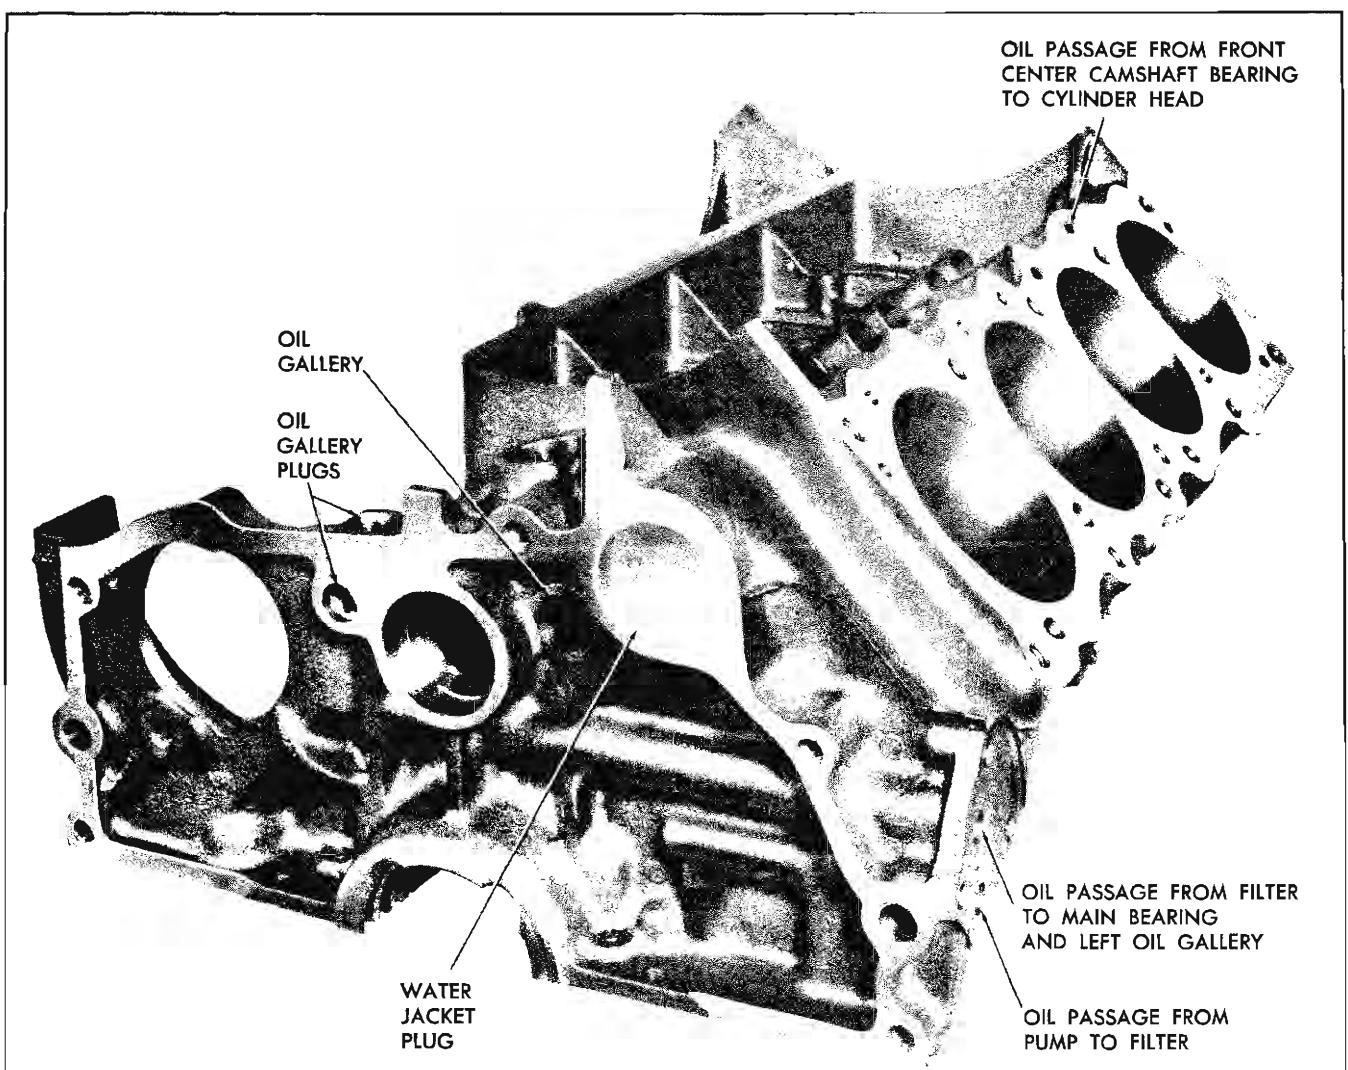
Cylinder Block—View from Right Rear—4 Cylinder Engine
